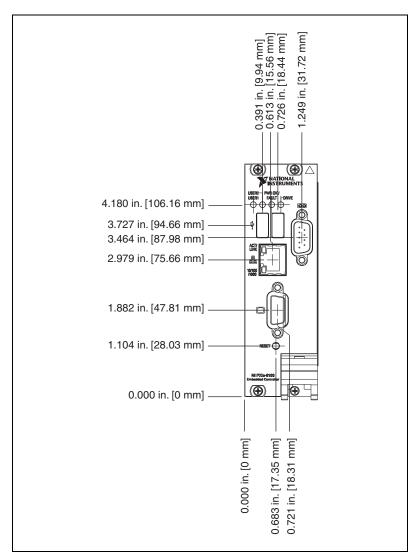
NI PXIe-8100 Front Panel Layout and Dimensions
